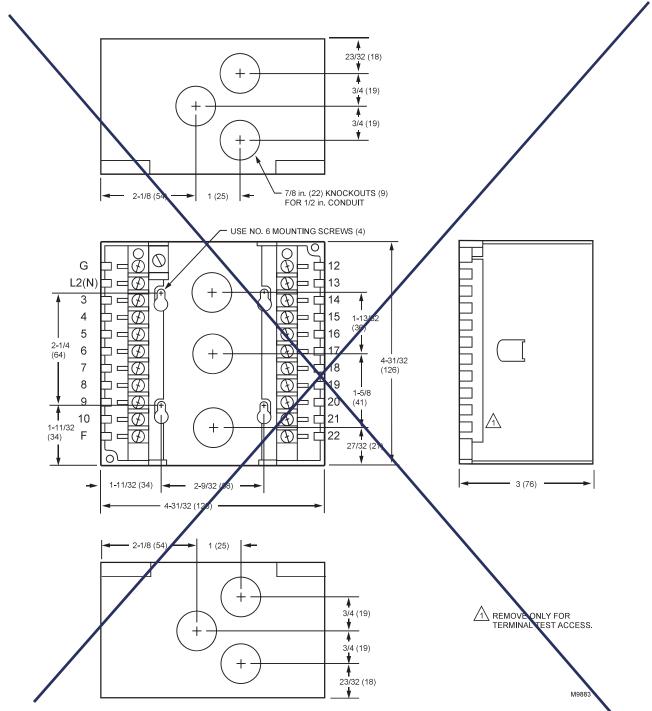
Top and front view of Q7800B1011 Wiring Subbase (4-sided) with dimensions in in. (mm).
